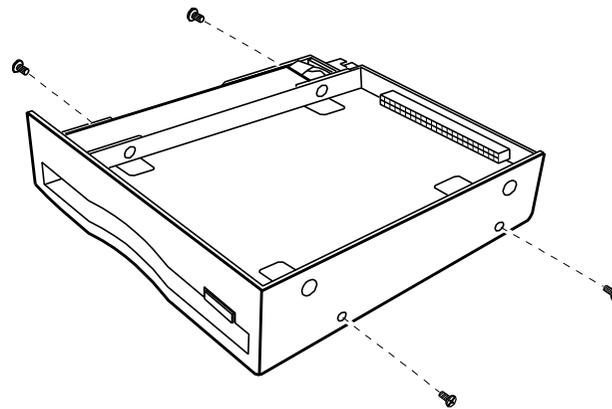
Detaching the Bracket From the Floppy Disk Drive
